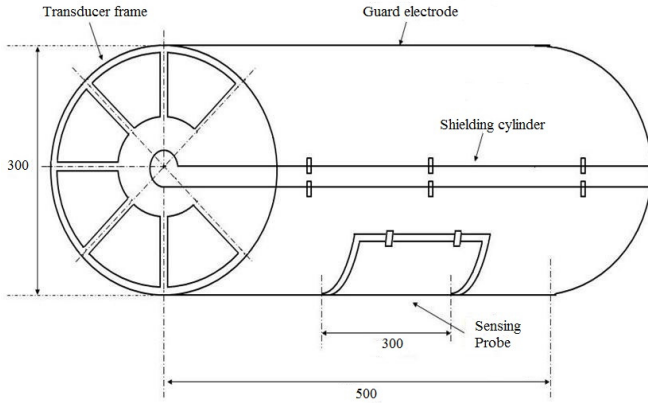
Configuration of the cylindrical-shaped voltage transducer (dimension in mm and not to scale).
